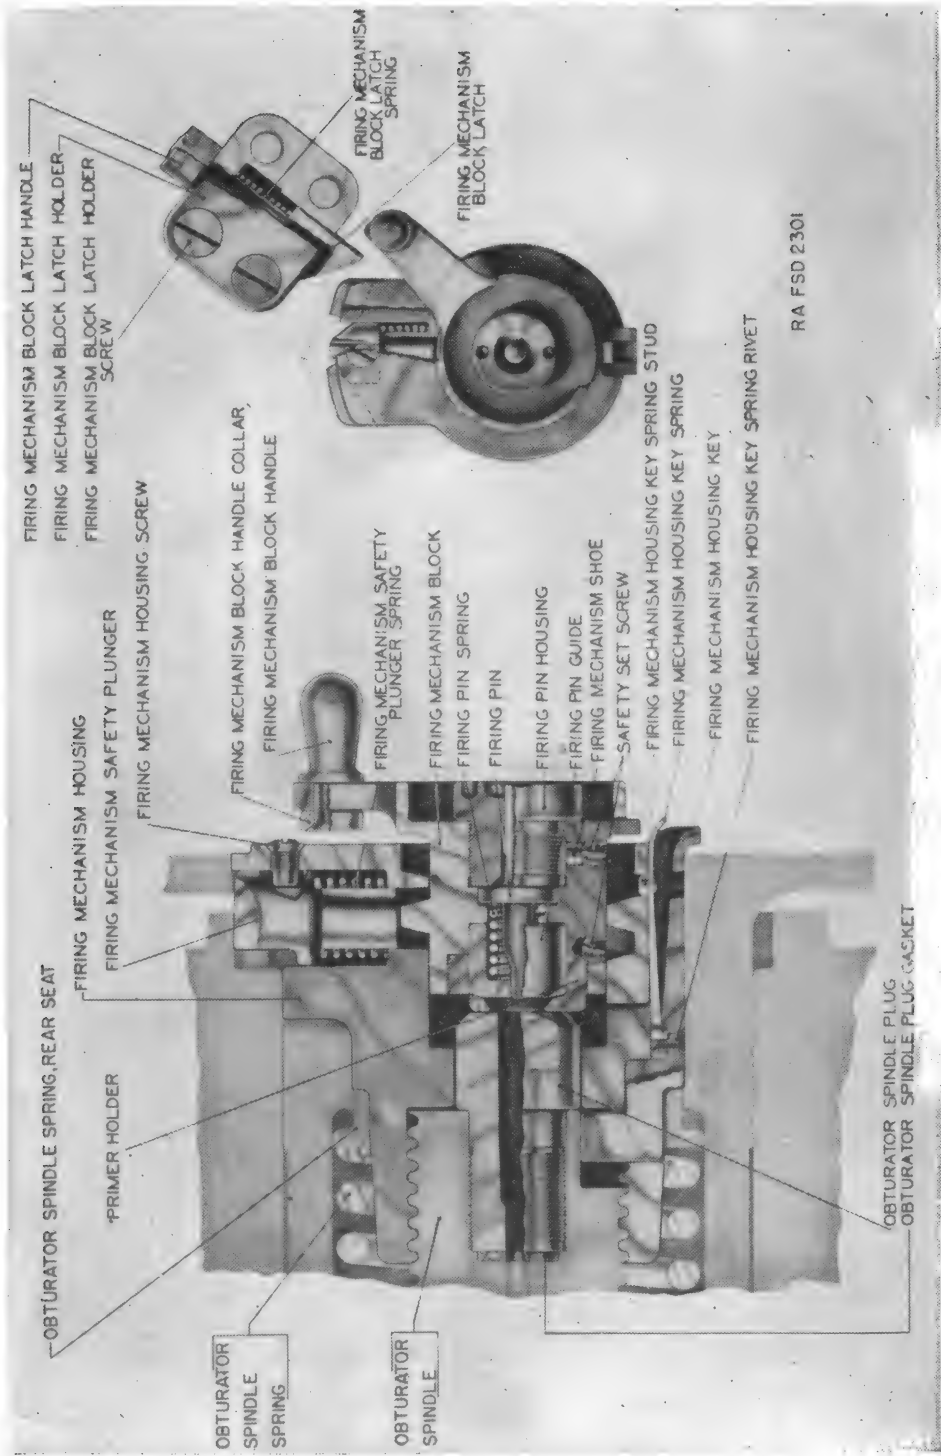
Firing mechanism—assembled and sectioned views.
